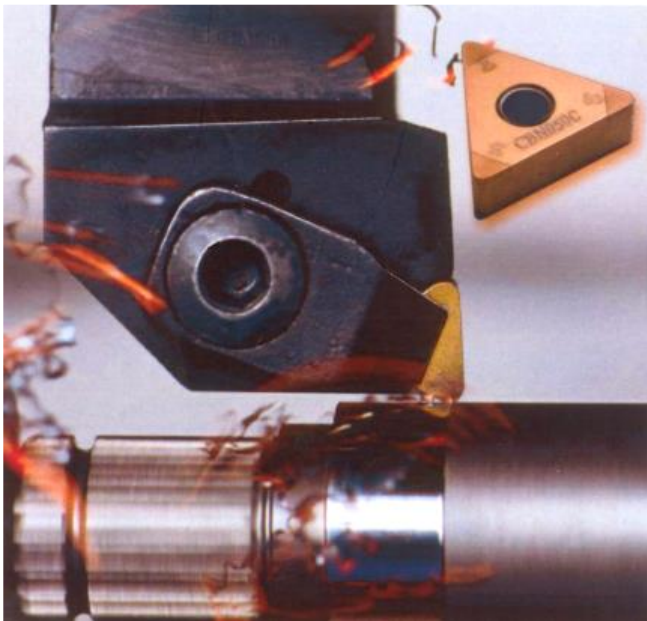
Example of high-performance turning using tool with BN insert in Secomax CBN050C type coated with PVD-Ti, Si-N and conditioned edges [15]
